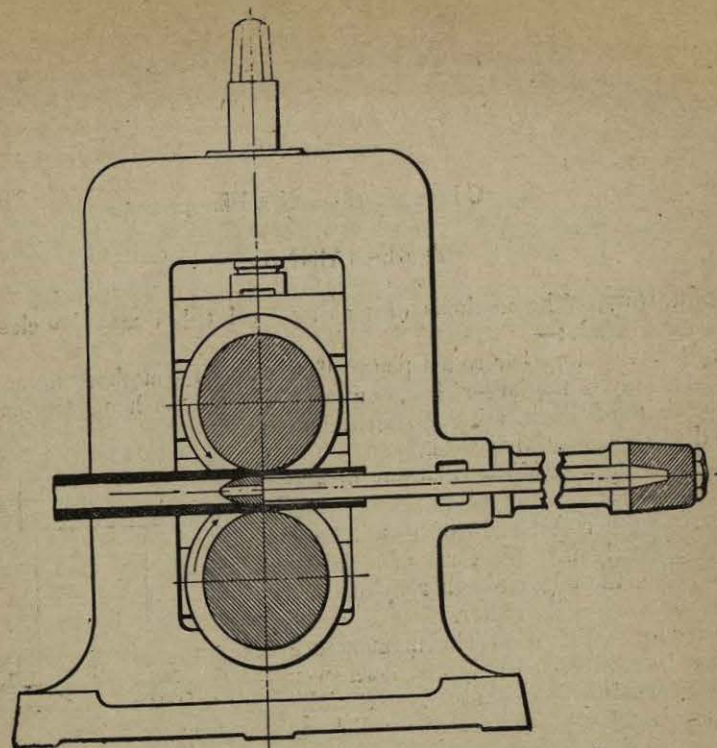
Rolling Weldless Tubes—“Rolling-on.”
